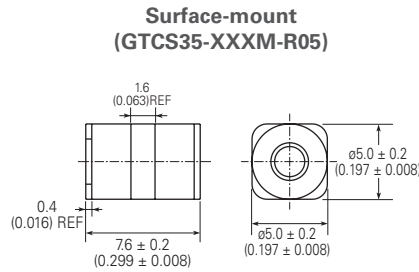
G11 — Dimensions for Gas Discharge Tubes
